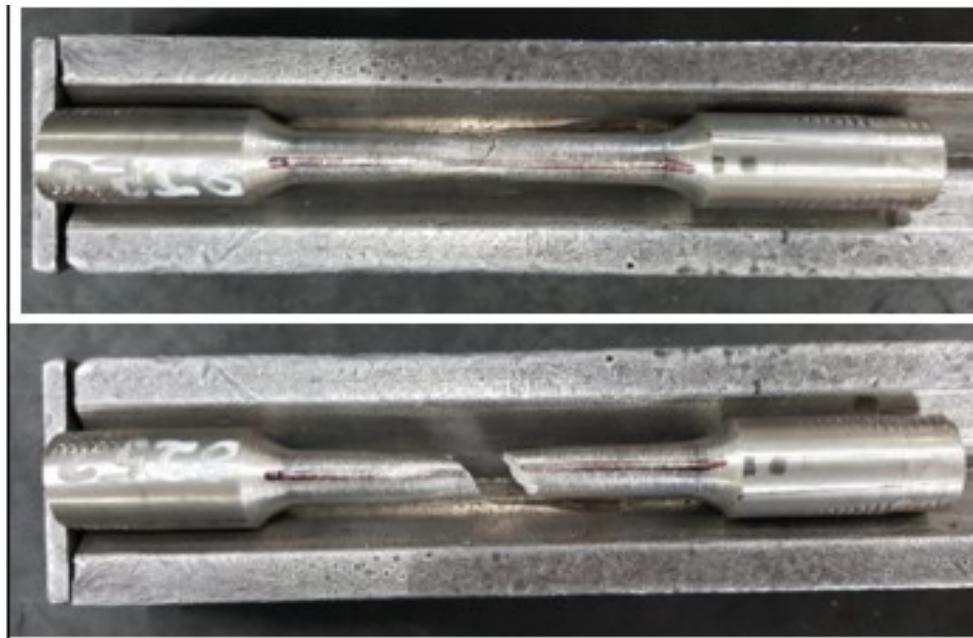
Fracture within Gauge length for all Weld Test Coupons
